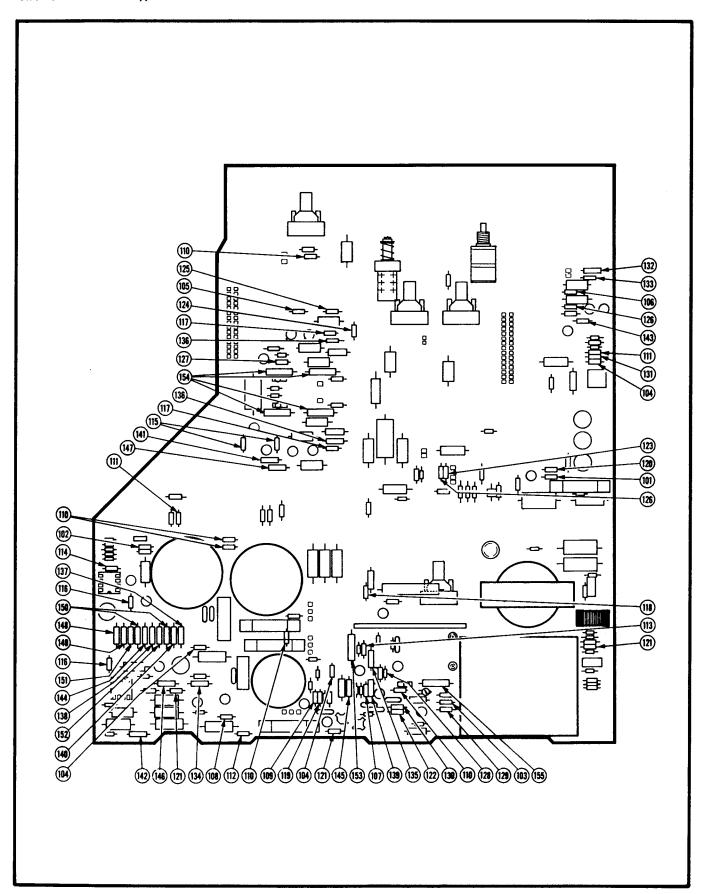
Circuit Board Assembly, Interface (Sheet 3 of 4).
